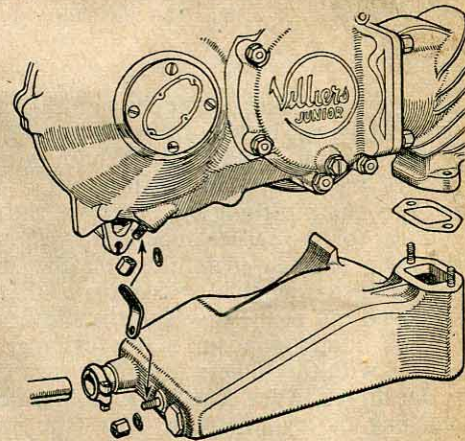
Method of attaching the silencer to the Villiers Junior engine
